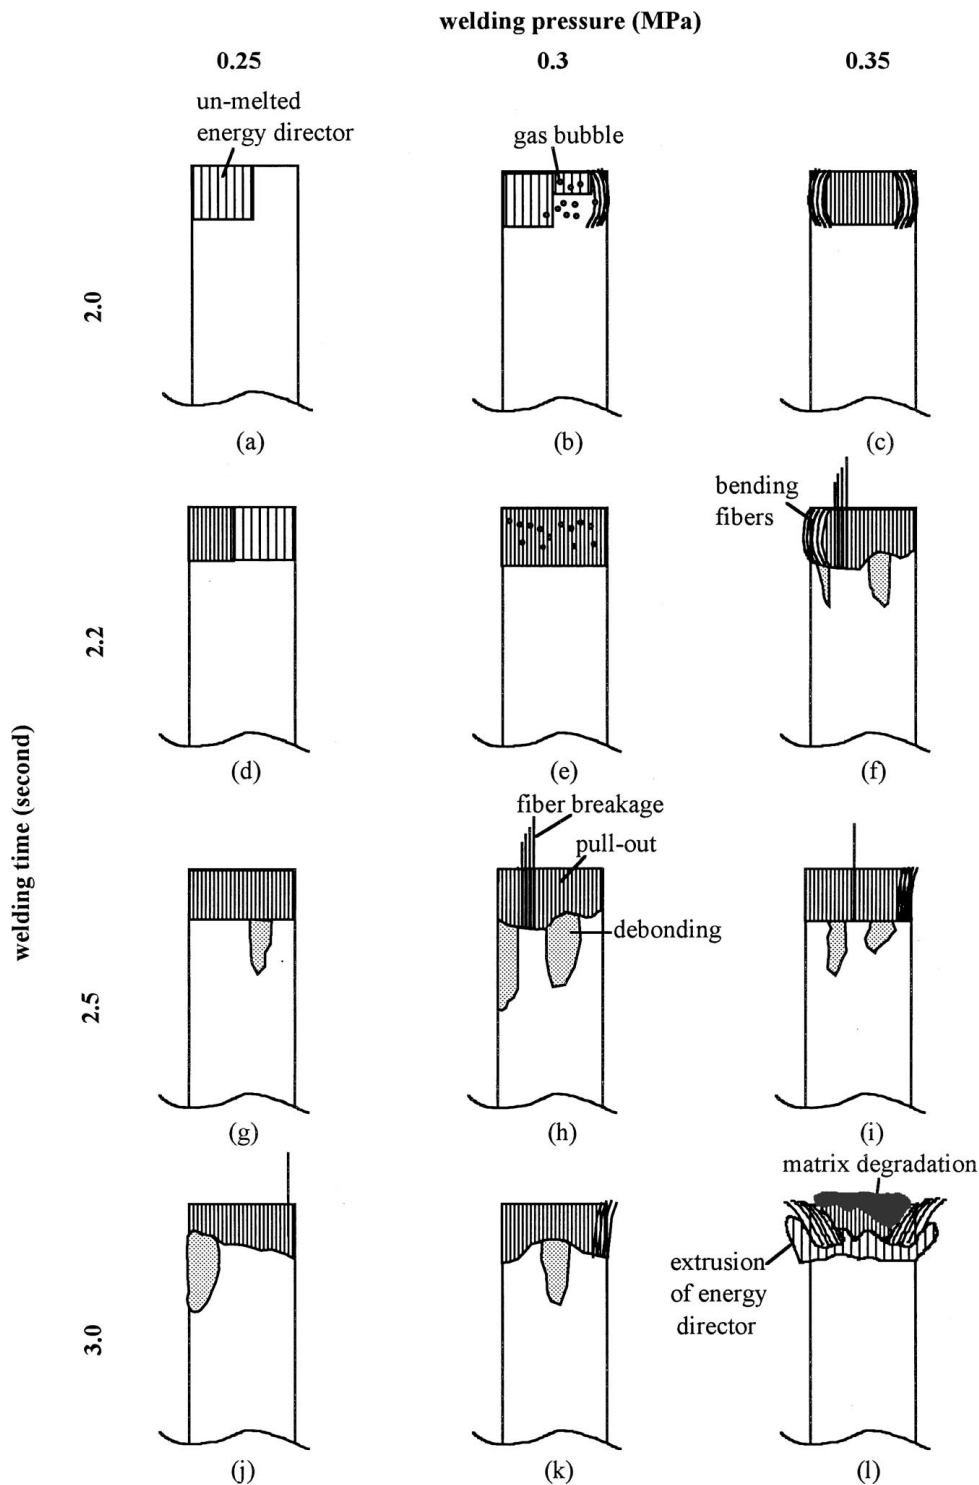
Damage mechanisms of 12 welded carbon/nylon composites under various welding pressures and times.
